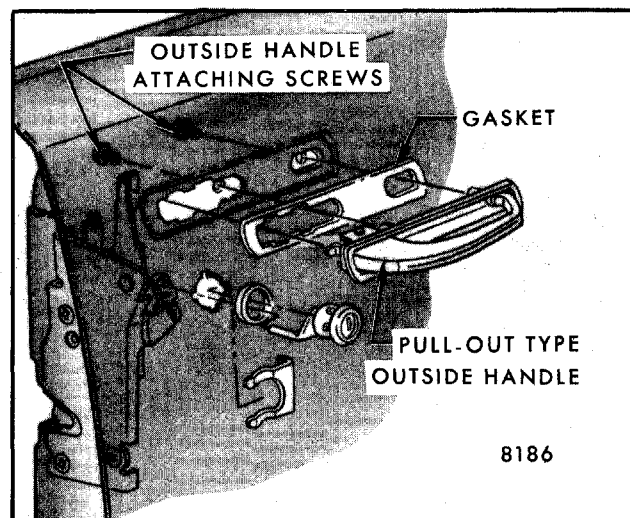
Outside Handle Removal (Pull-Out Type)
